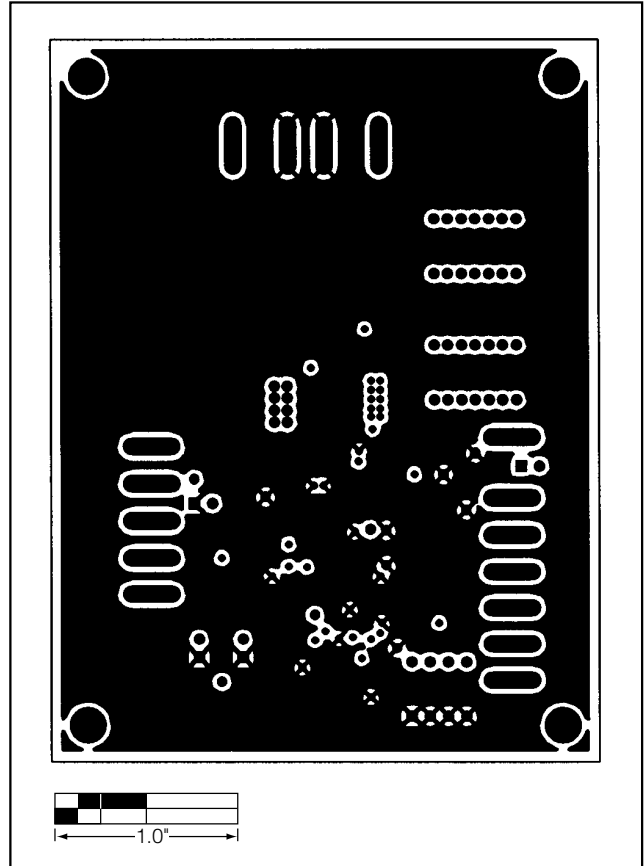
MAX1636 EV Kit PC Board Layout—Two Internal GND Planes
